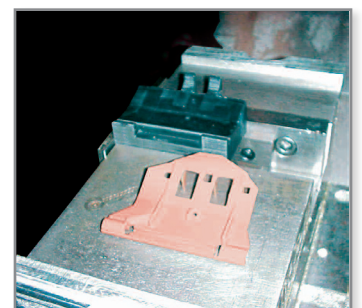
Black machining fixture at rear was manufactured from PC/ABS on a Fortus system.
